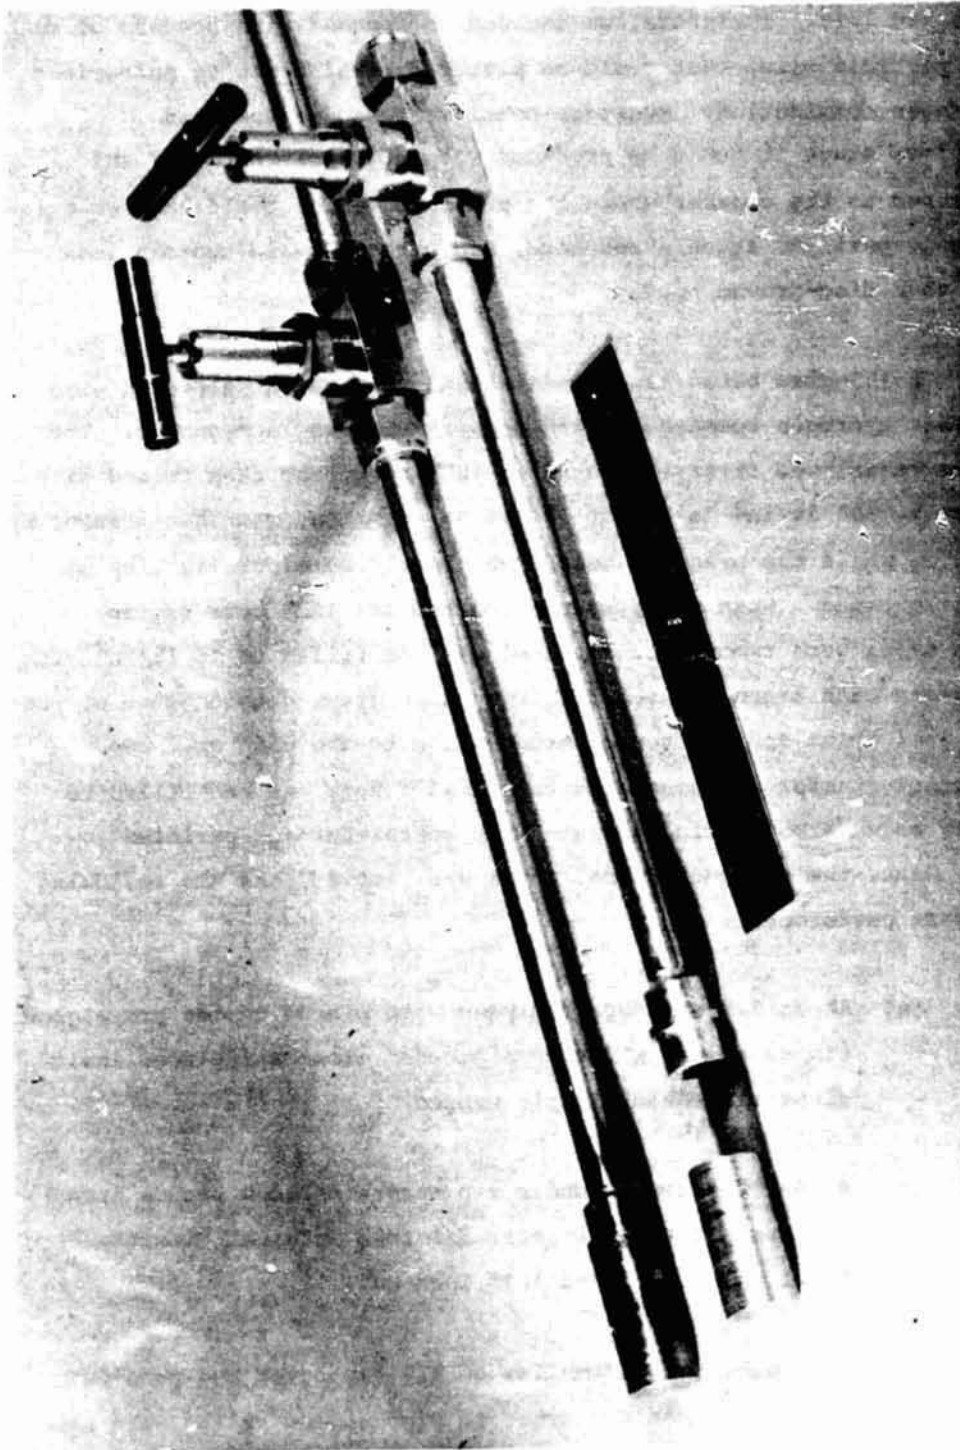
Welded and unwelded HIP cannisters and
